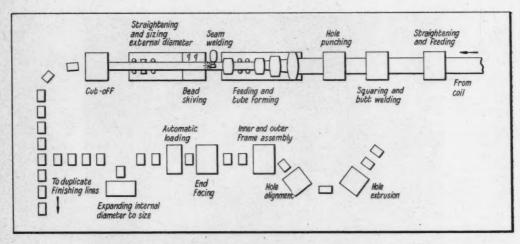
The fully automatic line is fed with steel strip from a coil at the upper right, and delivers assembled dynamo and starter-motor housings
